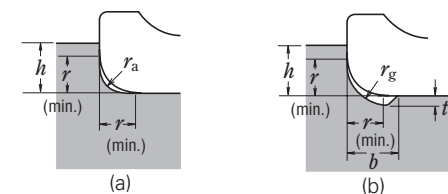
Chamfer Dimensions, Fillet Radius, and Shoulder Height
